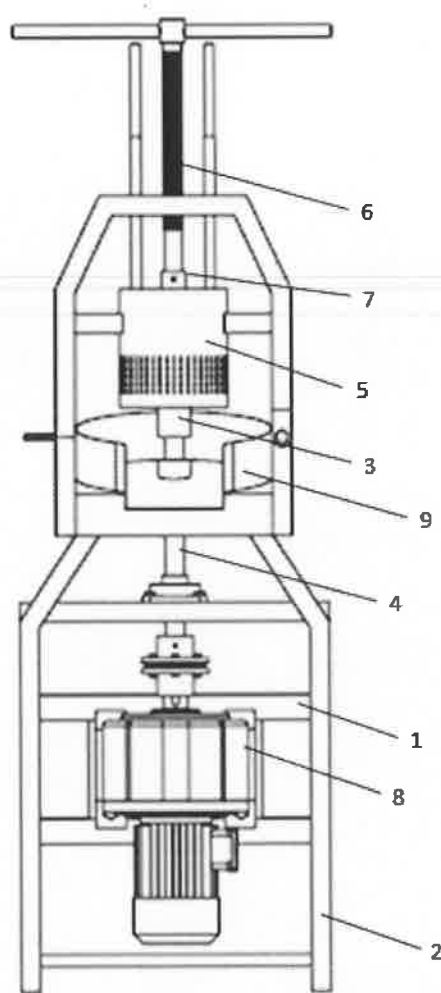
Drawing of a bench-top machine for oil palm mesocarp separation.
